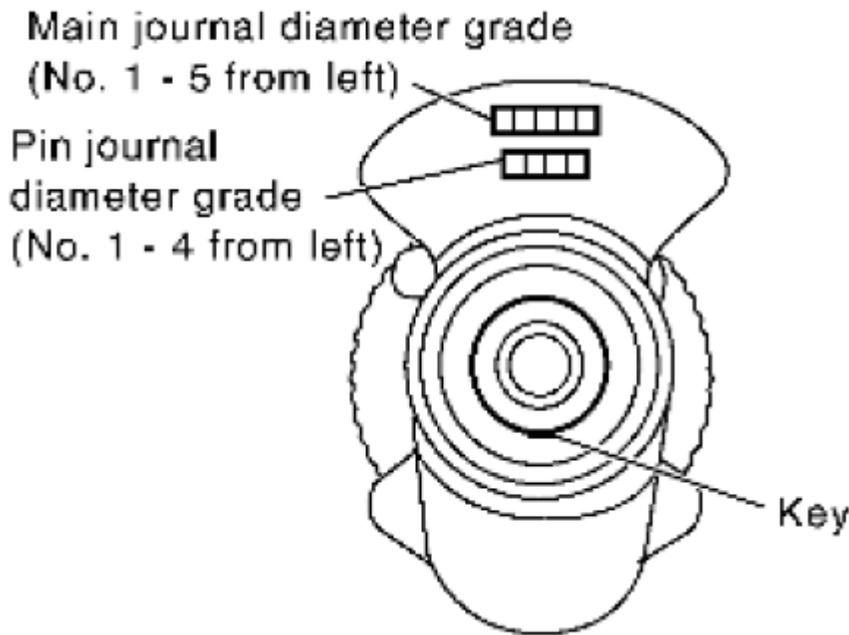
Identifying Crankshaft Pin Journal Diameter Grade And Main Journal Diameter Grade
